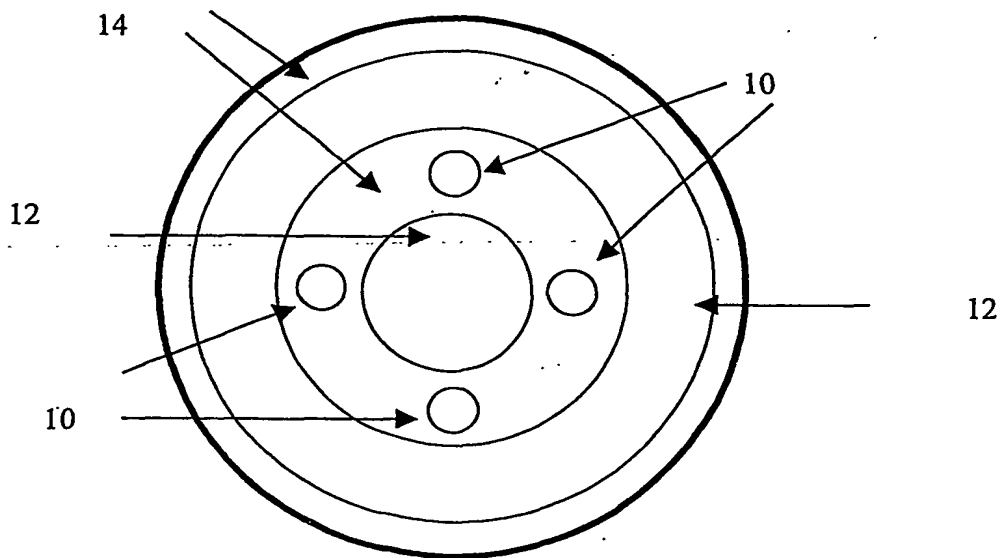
B A Multiple Sensor Assembly (not drawn to scale)
